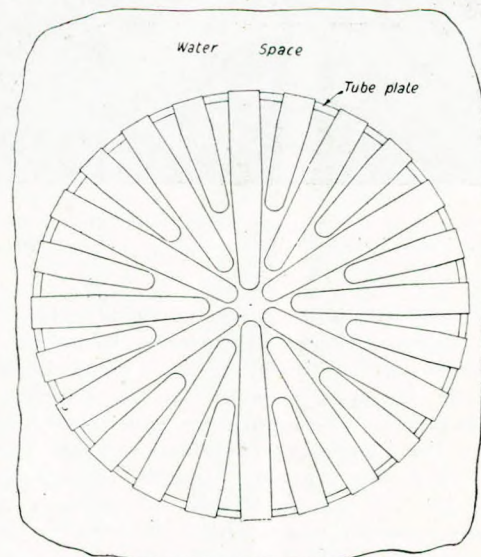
Section through a Baffleless boiler showing tube arrangements.
